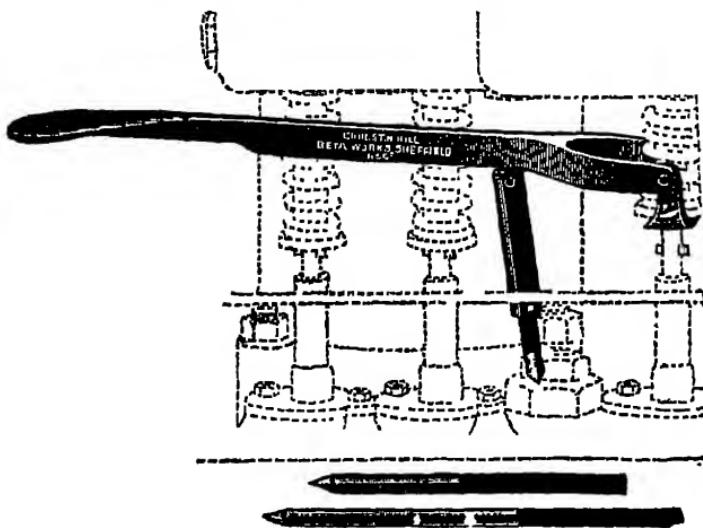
"NESTHILL" VALVE SPRING COMPRESSOR
